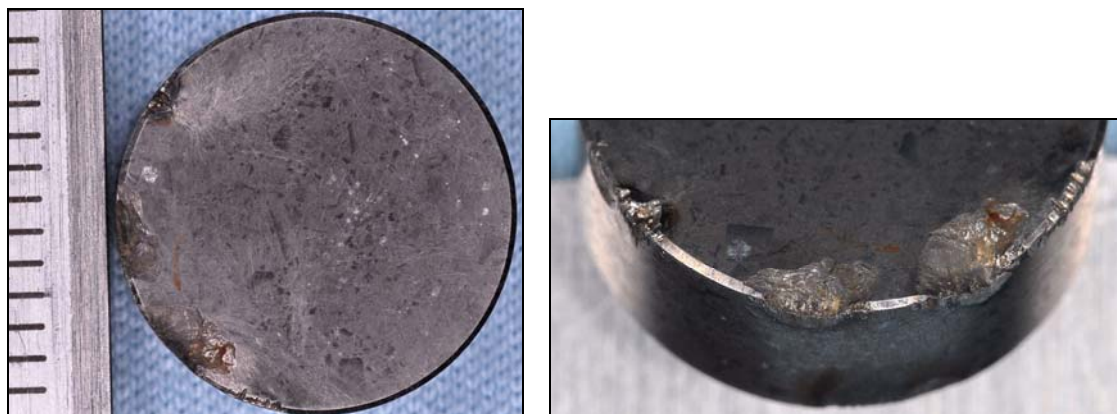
View of TiC-TiB₂ insert wear after cutting tests.
